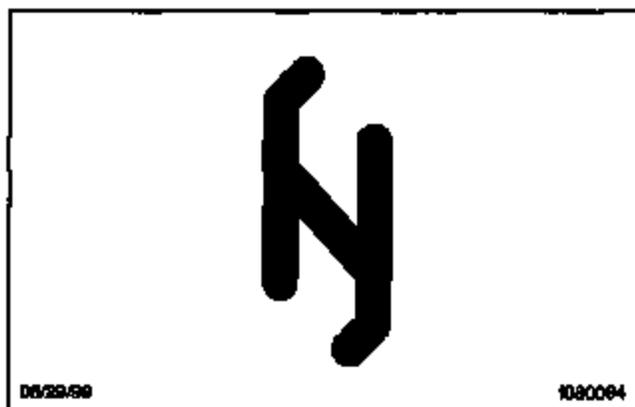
, Axle Retainer Marking (indicating magnetically inspected part)
